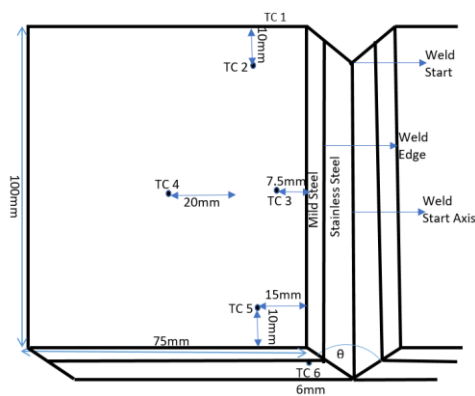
Top view of weld plan and thermocouple positions TC1 – TC6.
